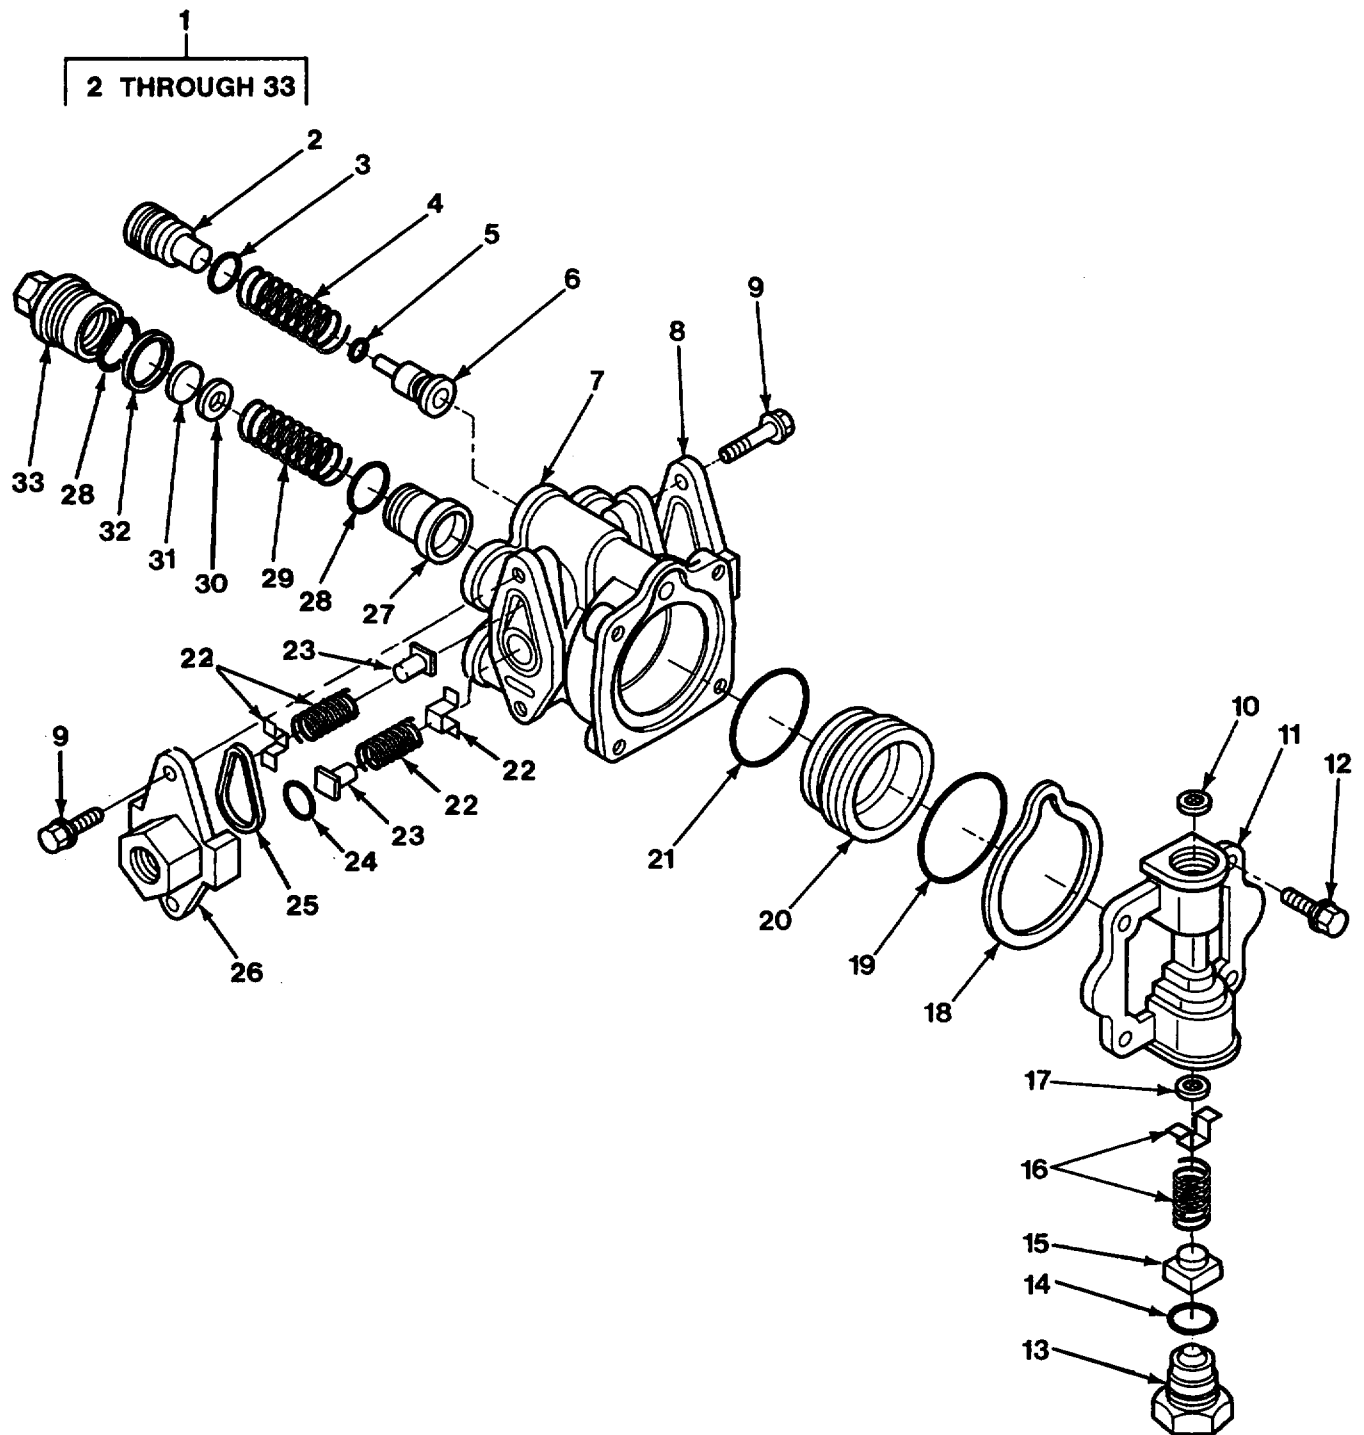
RATIO RELAY VALVE ASSEMBLY
